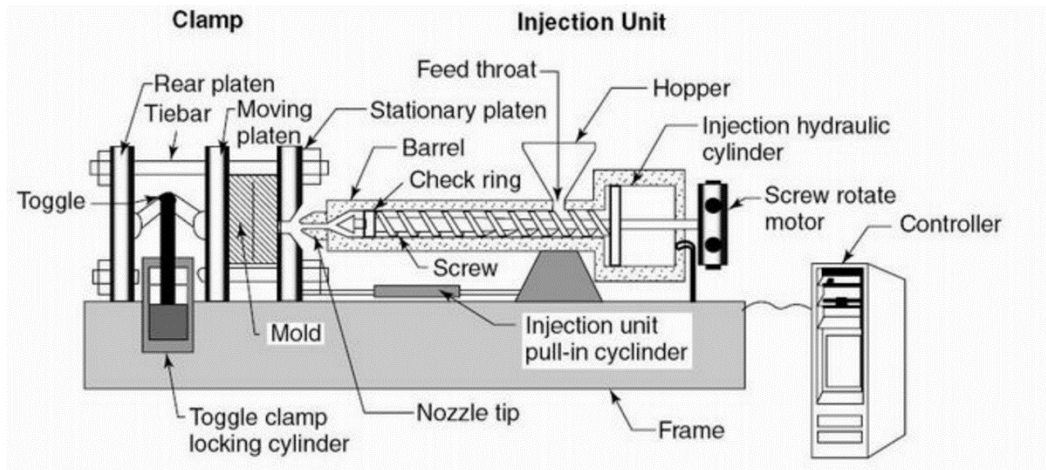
A toggle clamp injection moulding machine displaying the different components [35].
